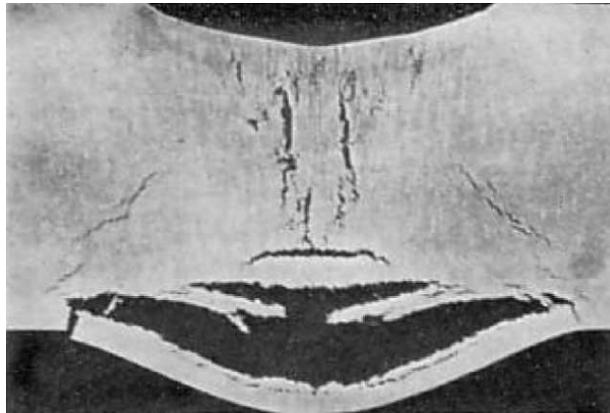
Spall fracture in a three inches mild steel plate subject to explosive loading (source Rinehart, 1952).
